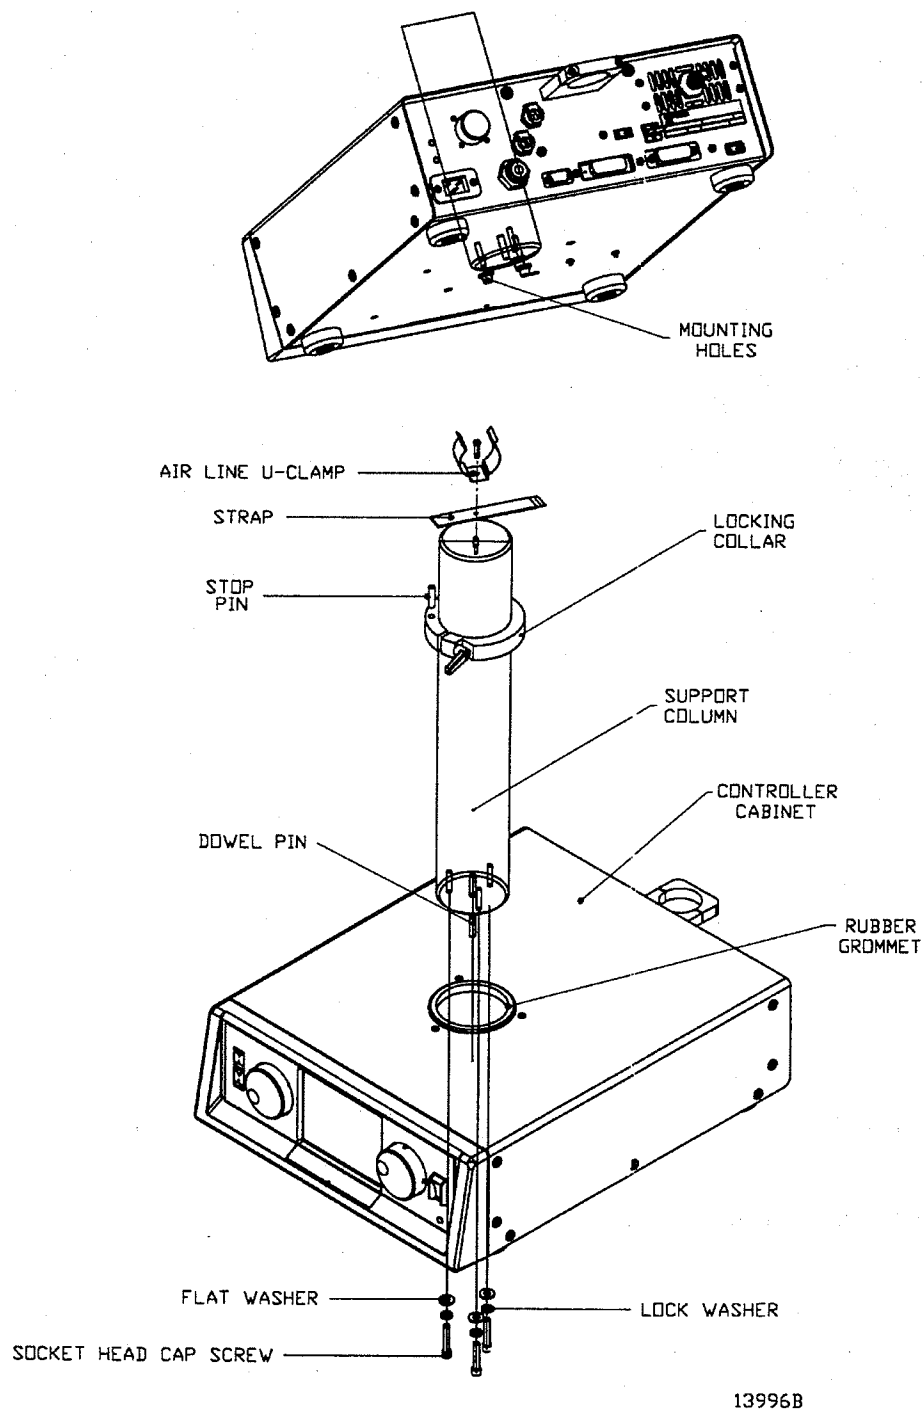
Thermal Wand Stand: Assemble Support Column
